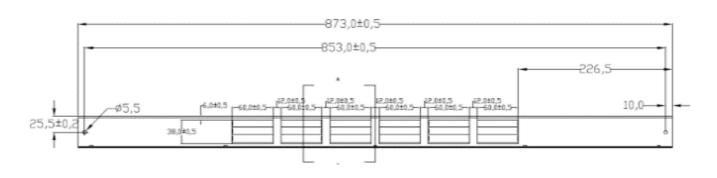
29 - PCB layout of Control PCB for models C74E-BBBC01 and C74E-BBBC02 (Optional IC)
